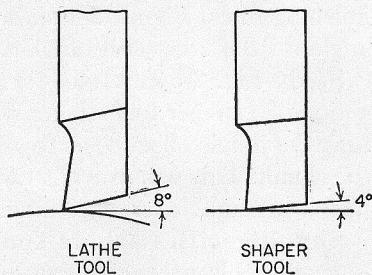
Comparison of front clearance angles of lathe and shaper tool bits.
